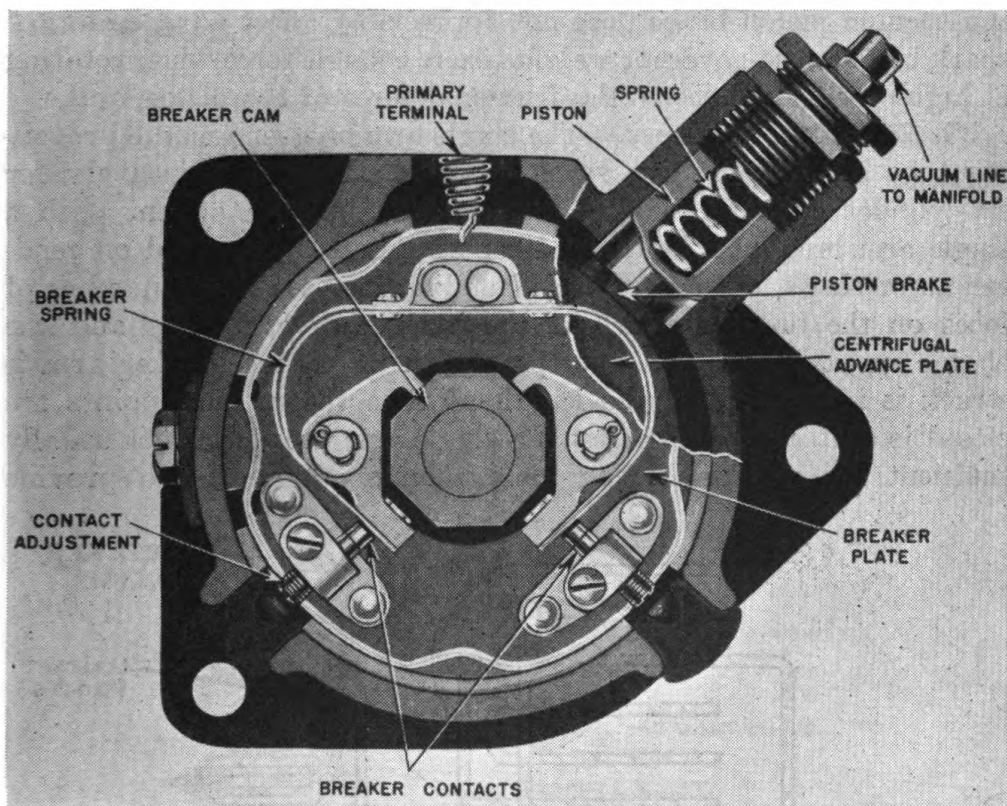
Vacuum brake automatic spark control mechanism.
